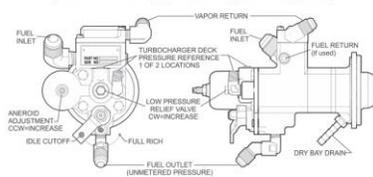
Aneroide and Mixture Control Equipped Fuel Pump, Turbocharged Engine
